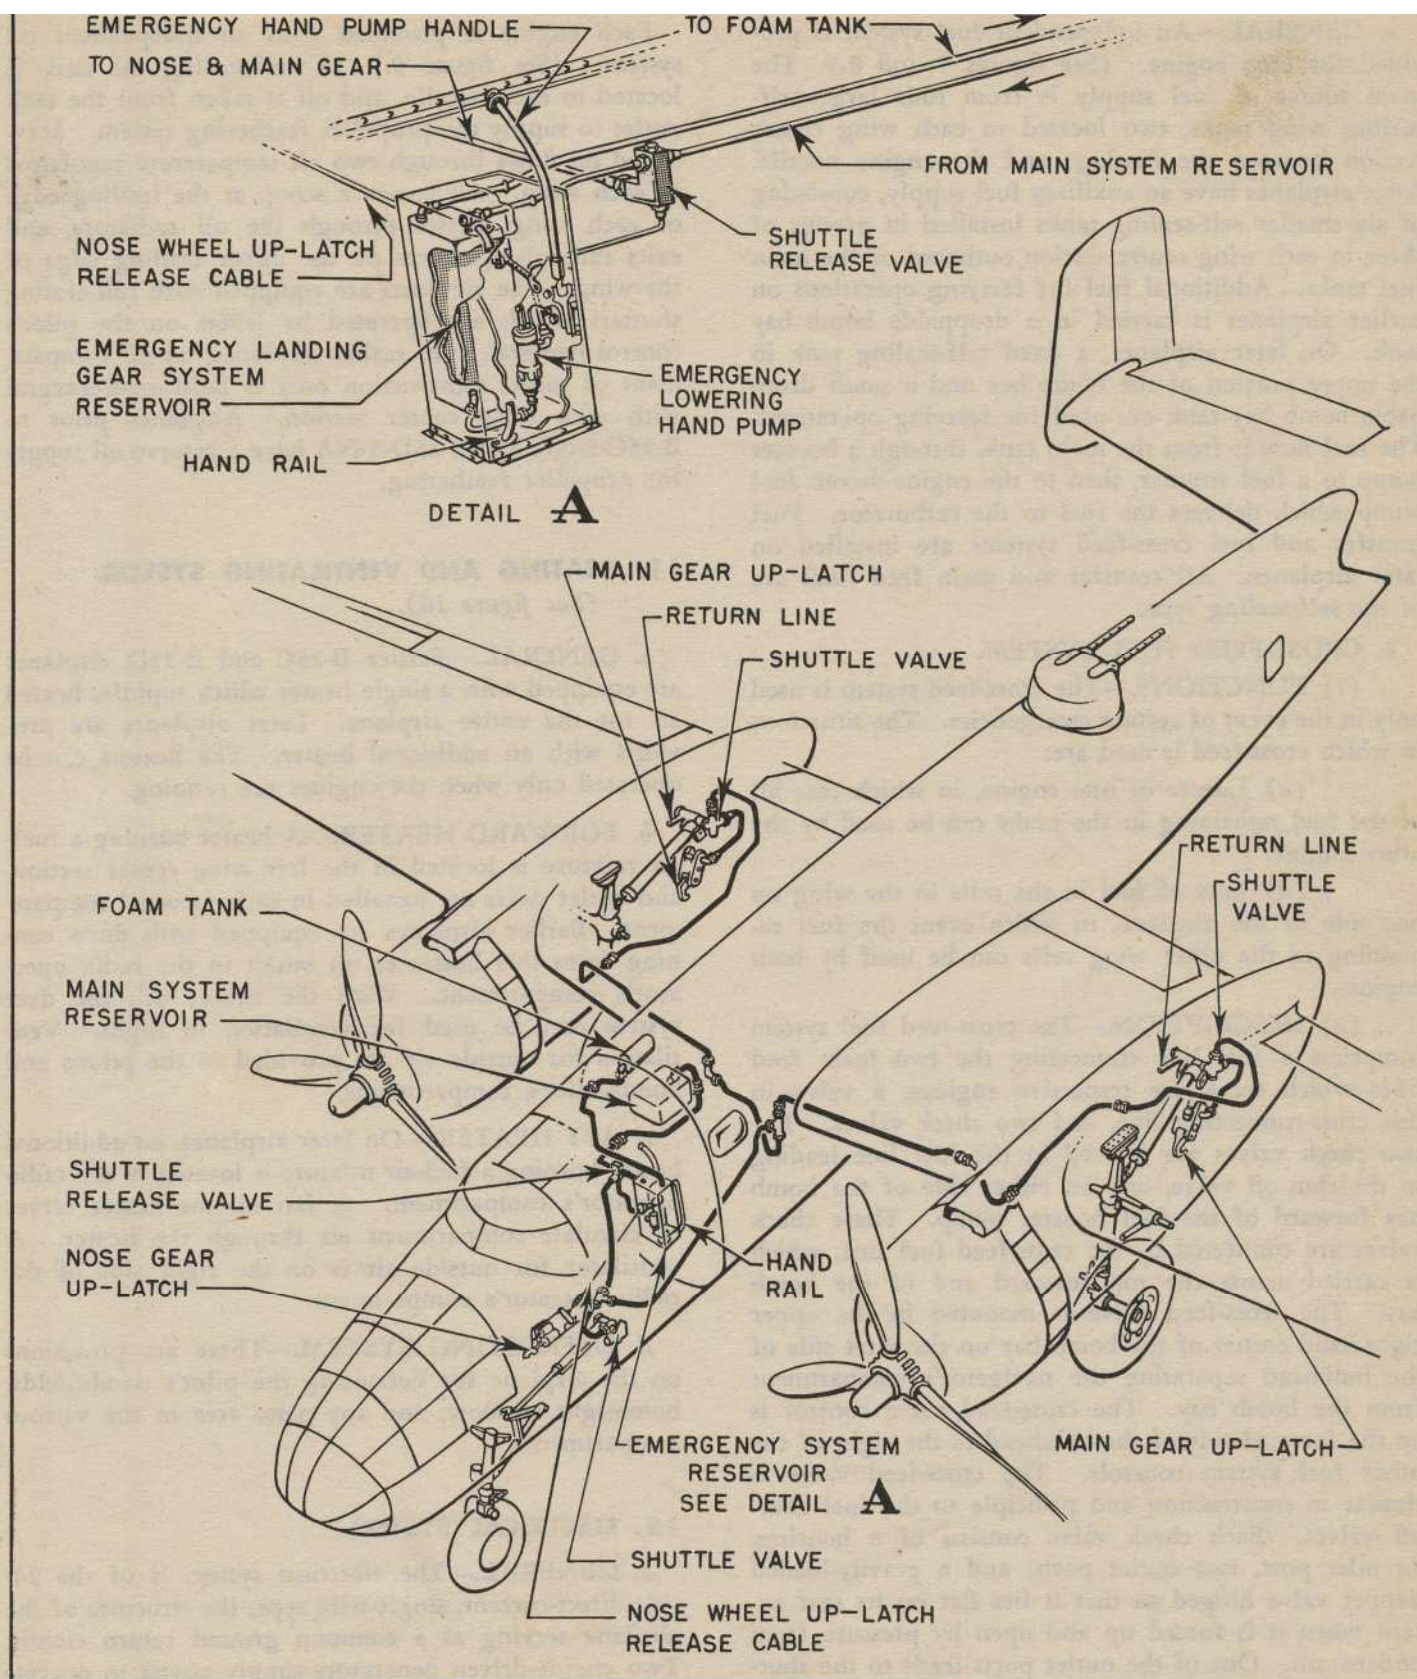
Hydraulic System—Landing Gear Emergency Lowering
